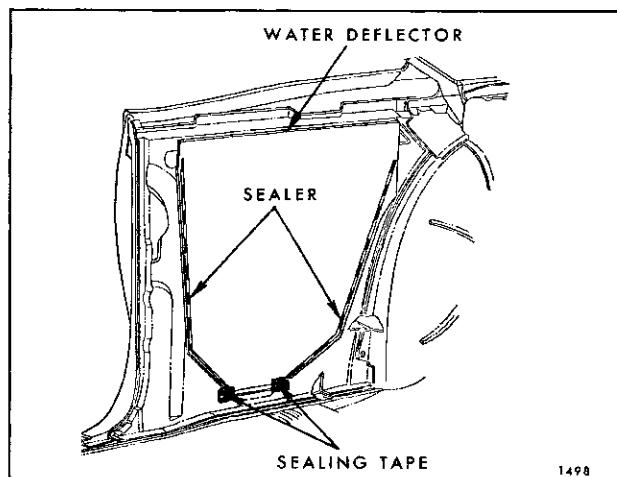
Rear Quarter Inner Panel Sealing - Typical of Water Deflector Installation
